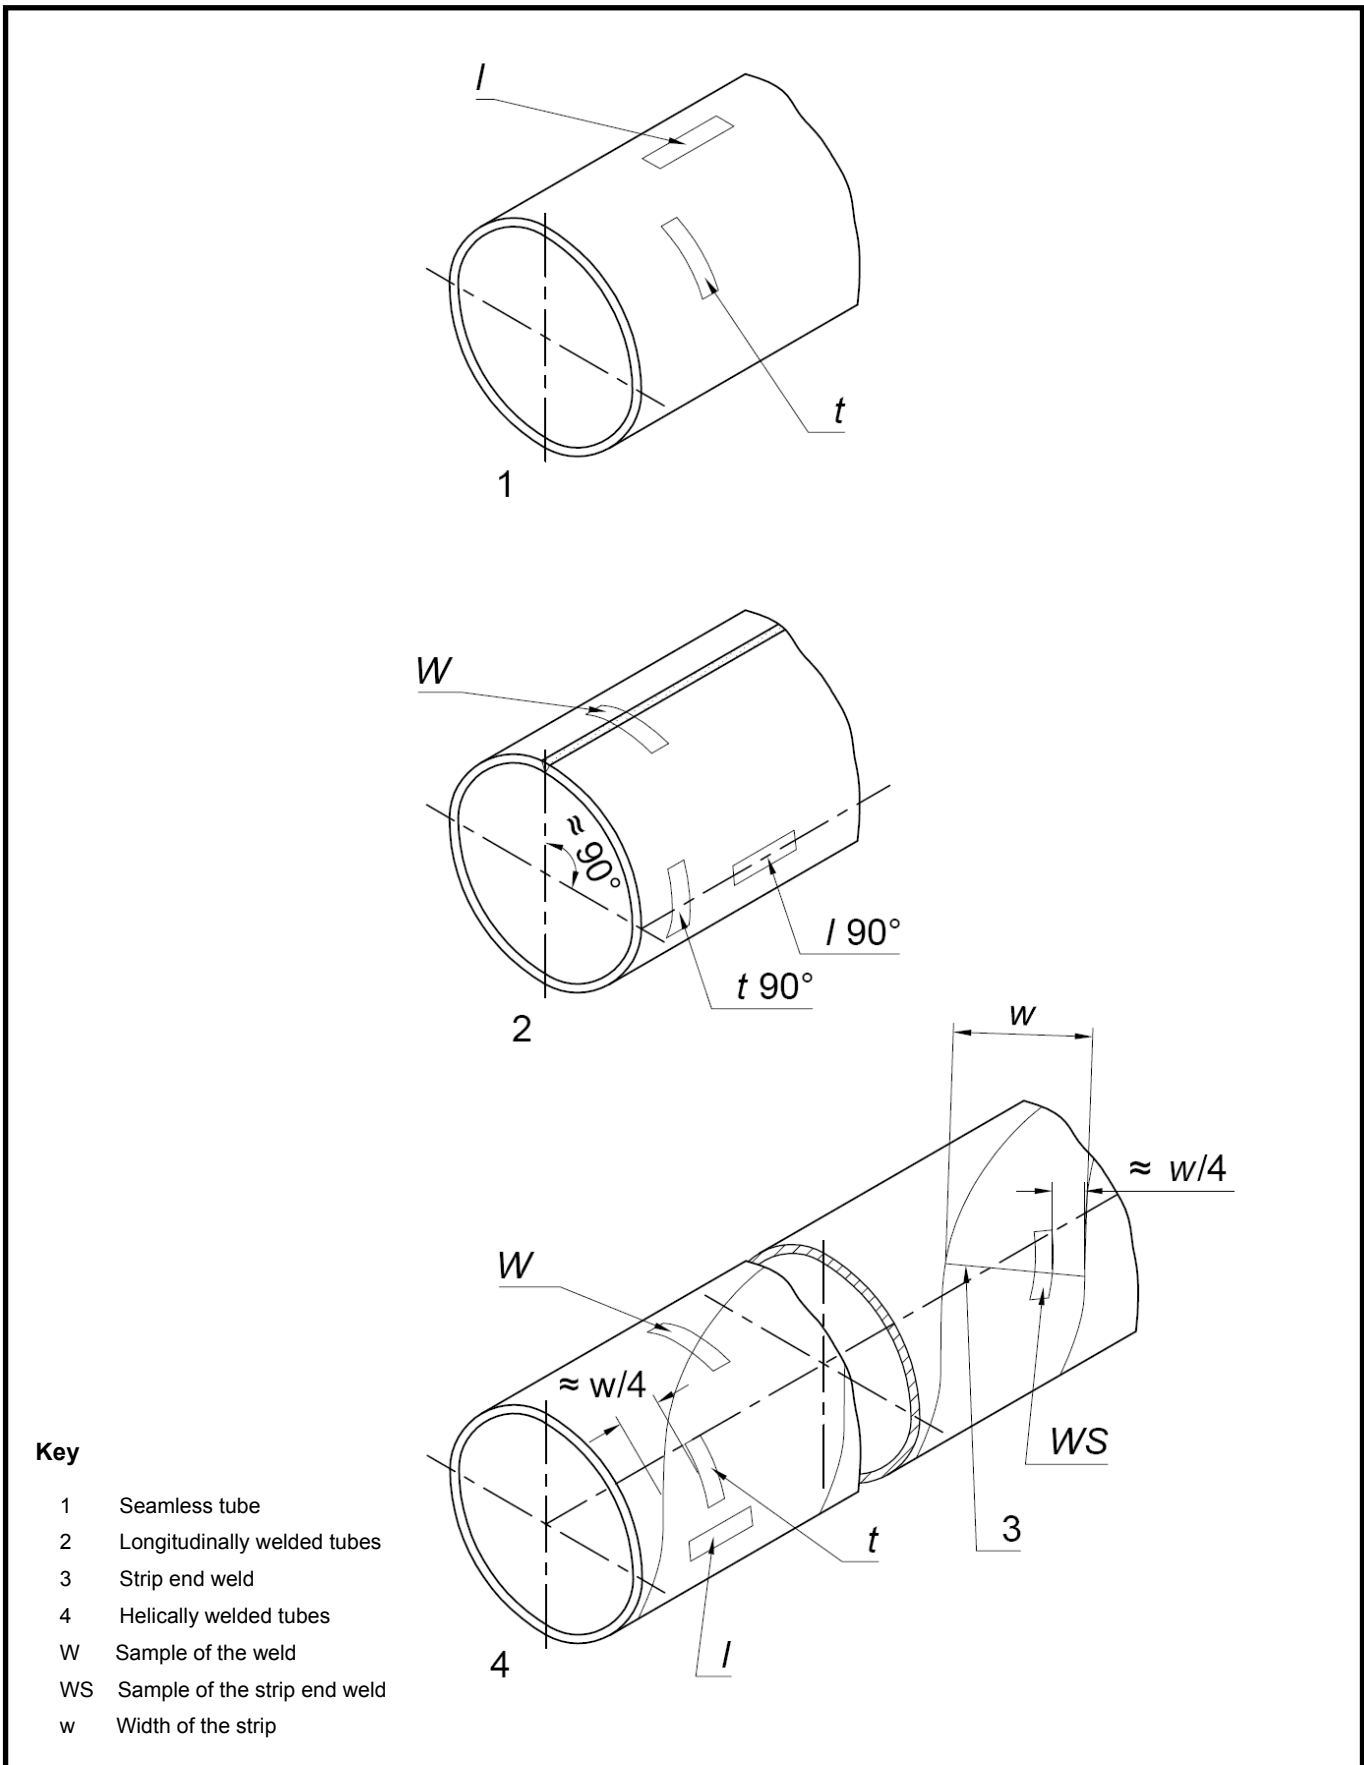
Location and direction of test pieces for the tensile and weld bend test
